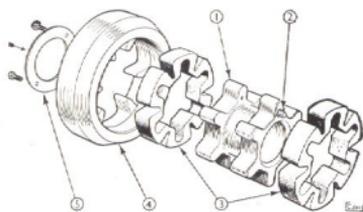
Exploded view of fuel-injection pump flywheel assembly.
